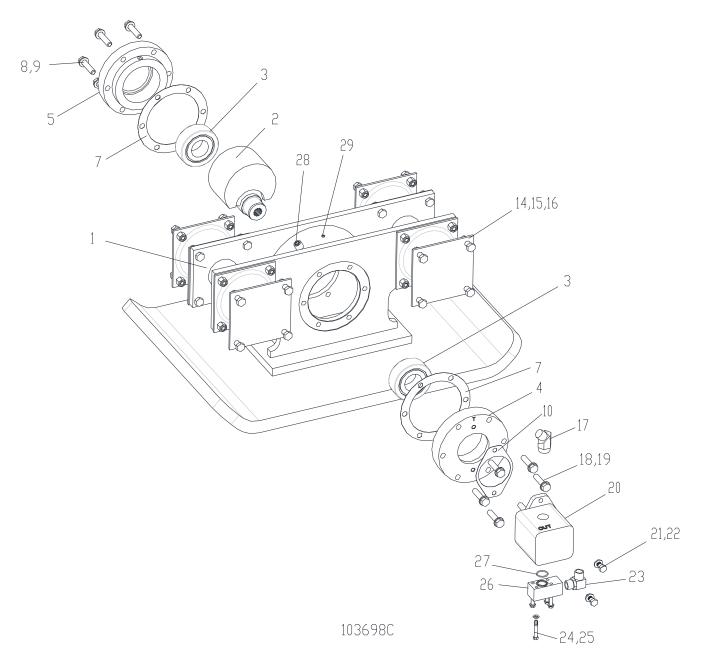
Dynamic Assembly with Weld-on Compaction Plate
